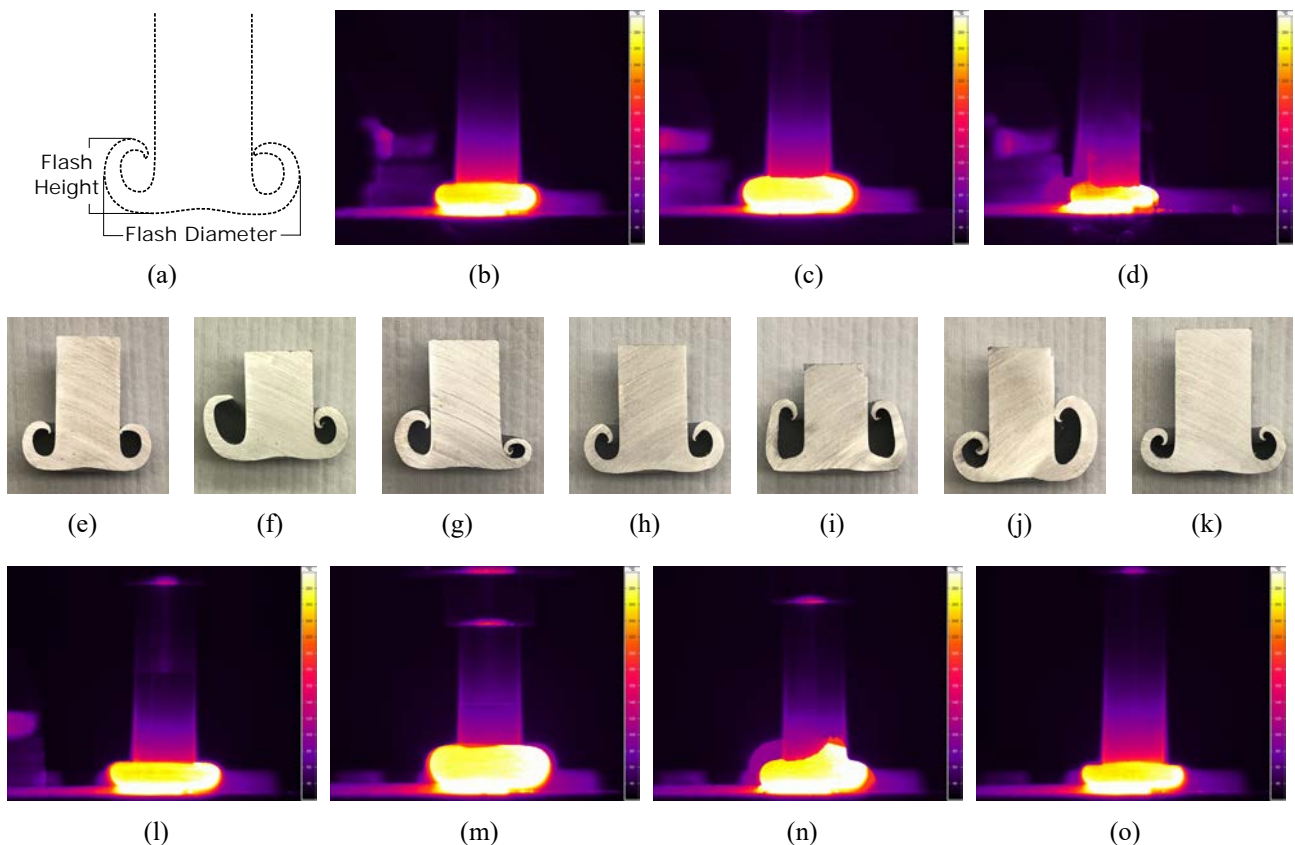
Schematic stud cross section (a); thermograms at 70 mm welding distance and cross section of remaining studs after 140 mm welding distance; 8 kN-1200 rpm-6 mm/s (b) and (e), 8 kN-1500 rpm-6 mm/s (c) and (f), 8 kN-900 rpm-6 mm/s (d) and (g), 8 kN-1200 rpm-8 mm/s (l) and (h), 8 kN-1200 rpm-4 mm/s (m) and (i), 10 kN-1200 rpm-6 mm/s (n) and (j) and 6 kN-1200 rpm-6 mm/s (o) and (k).
